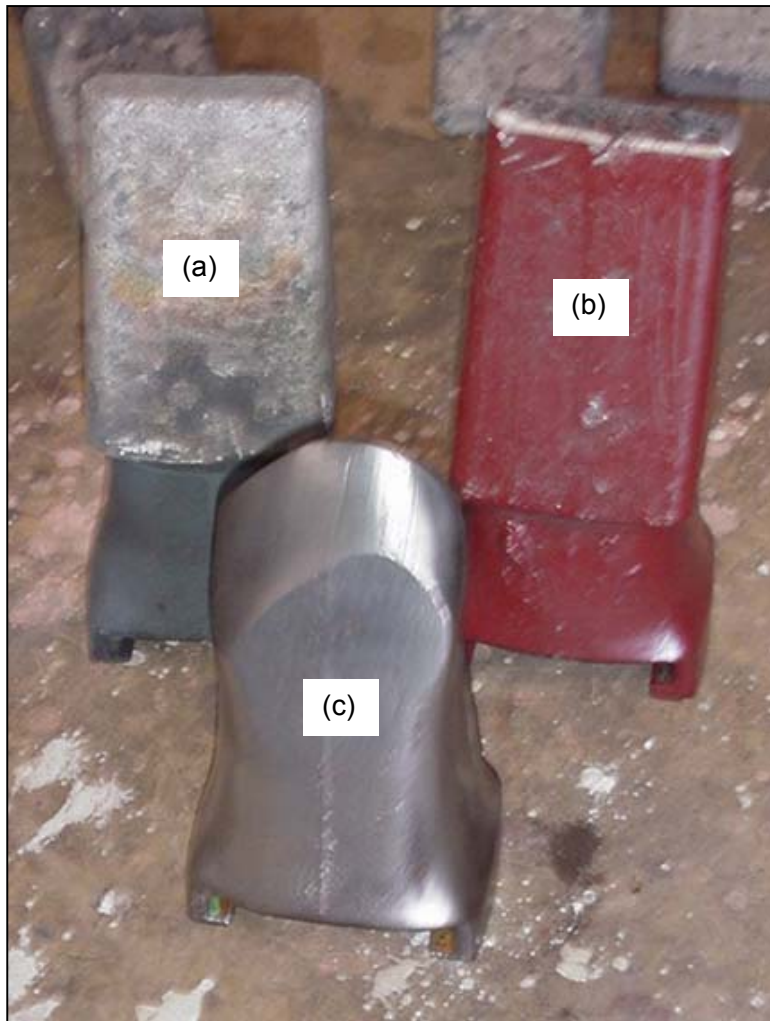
Detail of finished composite tooth (a), painted composite tooth (b) and original worn Cr/Mo steel tooth (c)
